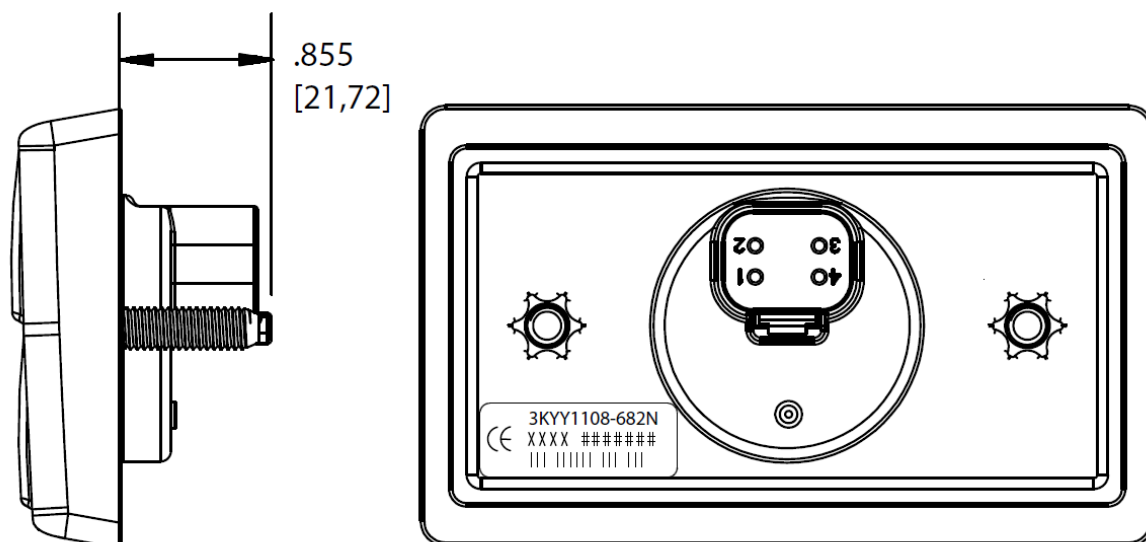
Rear & Side View of keypad indicating mounting stud positions
